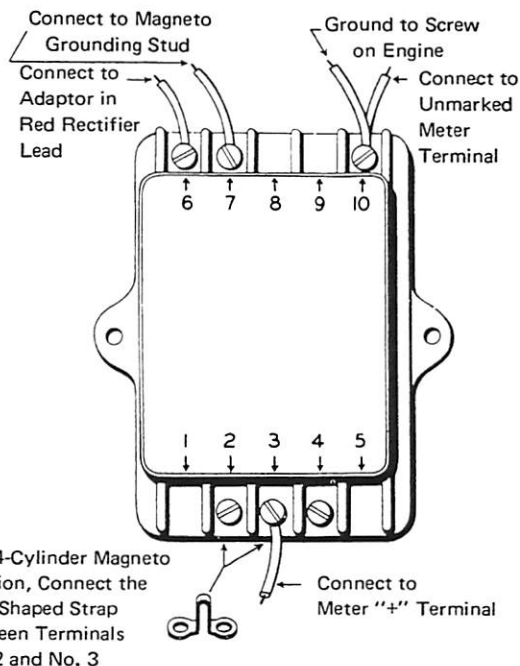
Wiring for 4-Cyl. Magneto Ignition System
